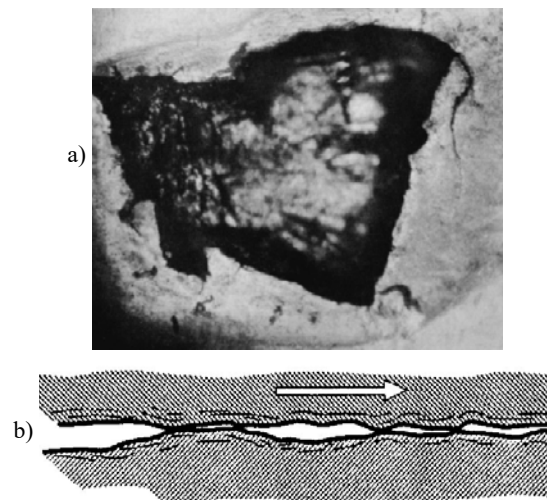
a) Fatigue fracture of steel balls (pitting); b) delamination wear: type of fatigue wear at slipping where cracks that spread a larger delaminated surface parallel to the created surface.
